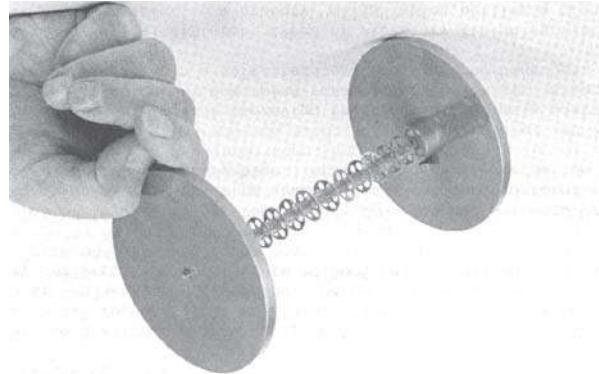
Special fixture used for deburring small gears. Rubber spacers between gears permit media to circulate freely. (H.D. Russell 1976)
